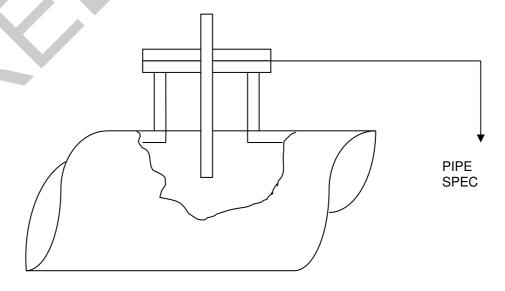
Schematic of the Chemical Injection, Flanged Type, on top side umbilical connectors.
